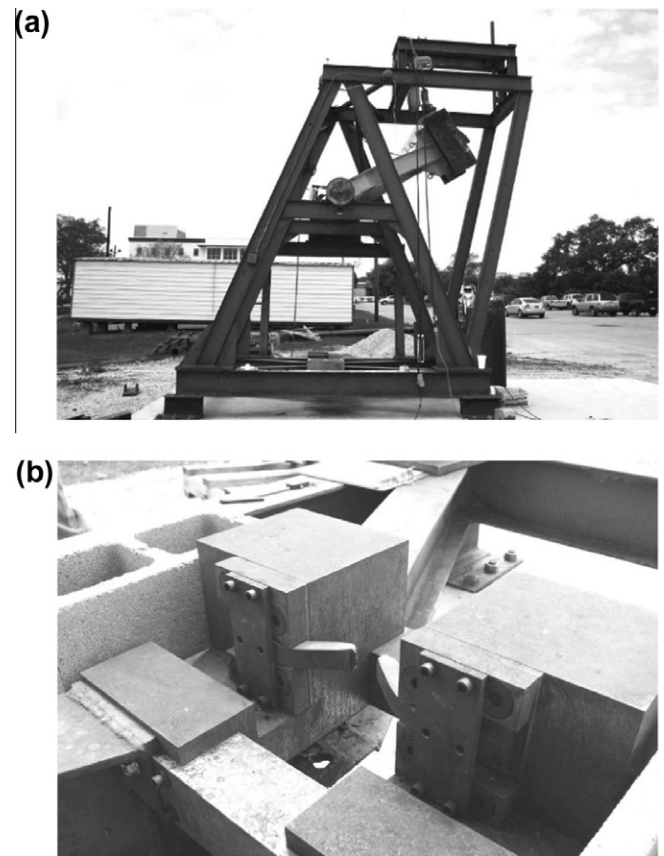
Bulk Fracture Charpy Machine (BFCM) for testing unnotched steel specimens, and zoomed-in view of the test fixture holding a fractured specimen.
